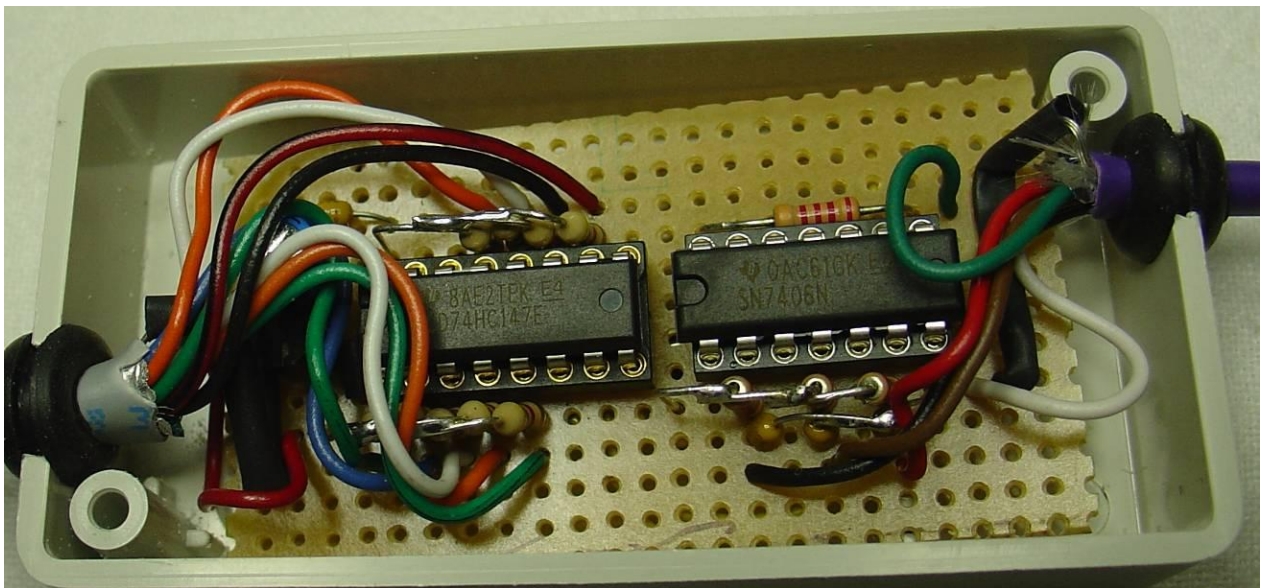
Final completed assembly ready to be hot-glued in place. Note the I/O grommets.
